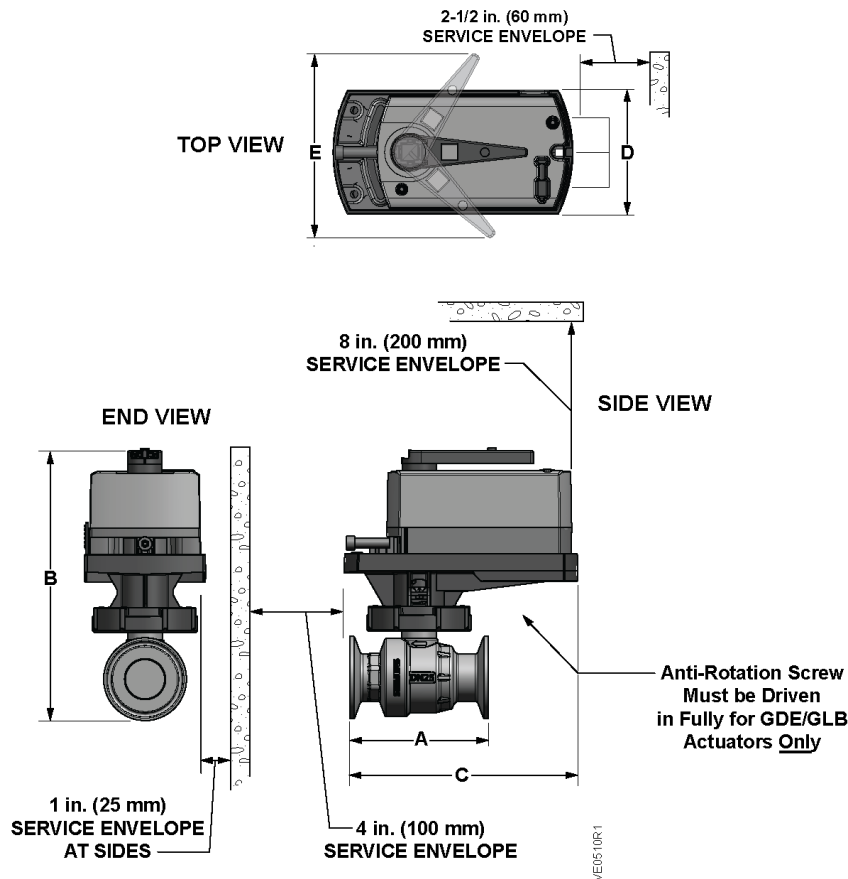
Two-Way Ball Valve and Actuator Dimensions in Inches (Millimeters)
